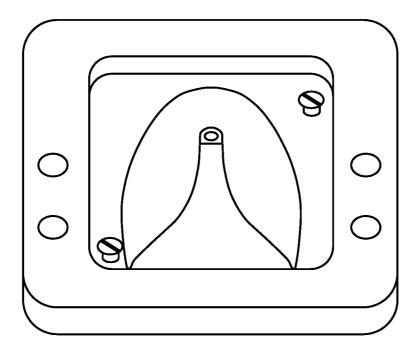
Metal mounting tray with heel in position before addition of molten metal alloy
